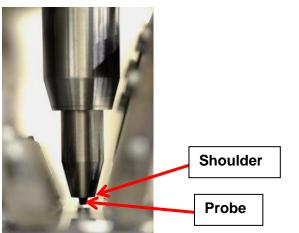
The Shoulder and the Probe of a FSW tool (ESAB, 2014)
